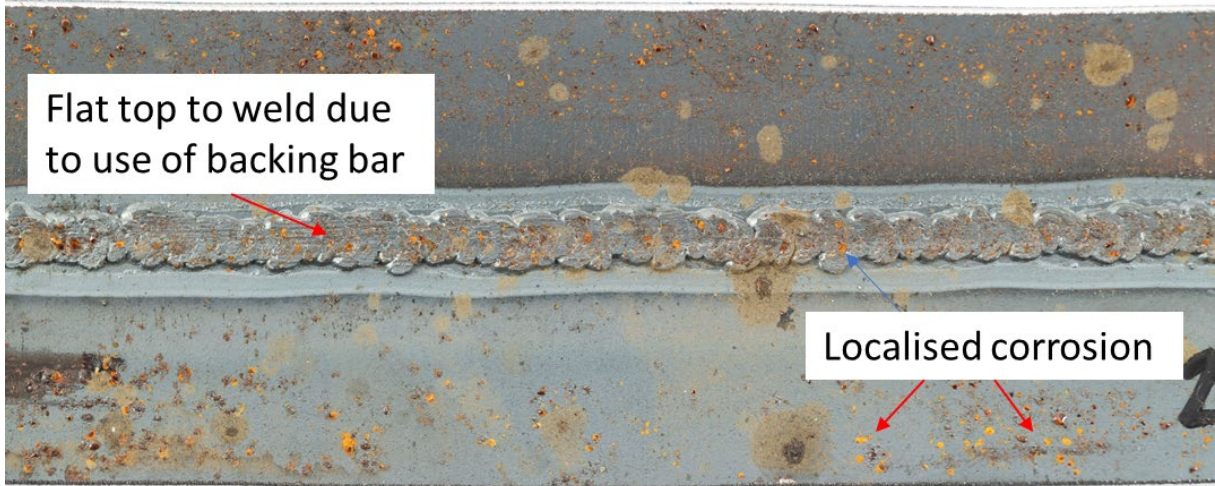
Photograph showing an example of a weld with a flat top and localised corrosion
